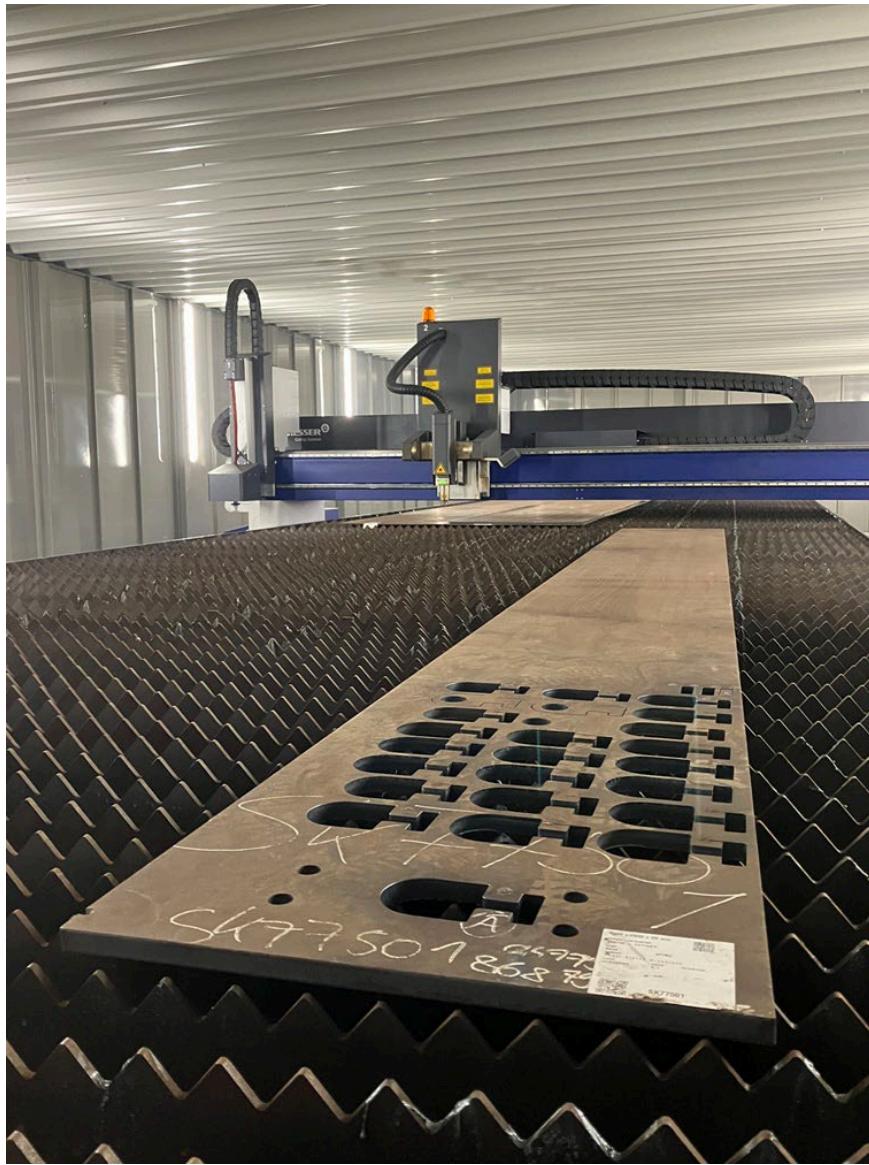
The ELEMENT L is equipped with a needle marker and bevel cutting head Bevel-U.
